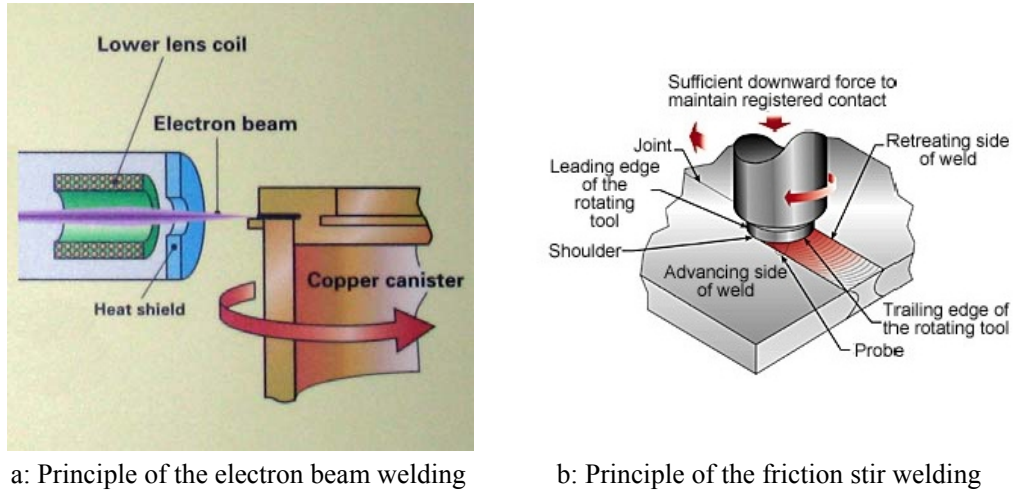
Principle of the electron beam welding and friction stir welding
